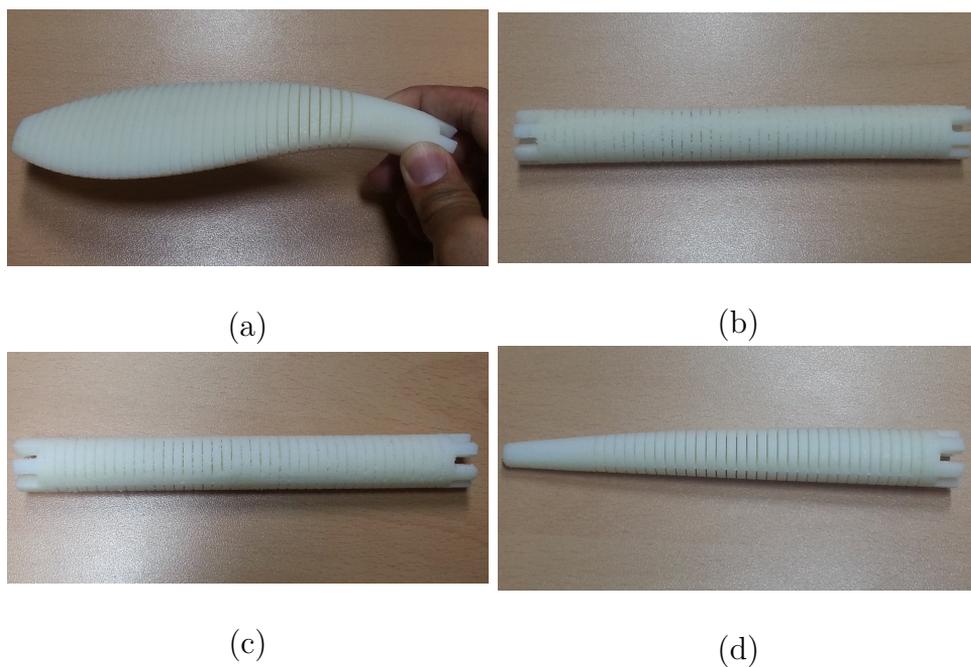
3D Printed body parts of the snake (a) head, (b) upper body, (c) lower body, and (d) tail.
